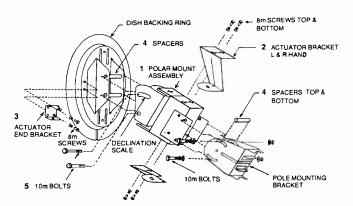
Exploded view of the Lenson Heath polar mount assembly. An additional bracket is required with the 80cm dish.
